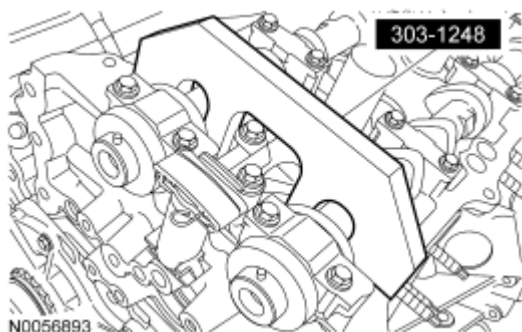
Removing Special Tool (303-1248) From LH Camshafts
